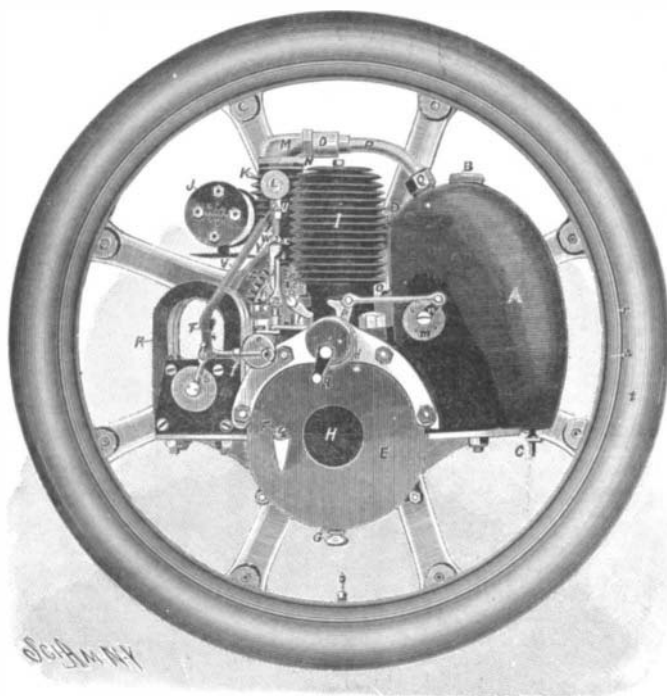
INTERIOR OF BACK WHEEL, SHOWING MOTOR.
